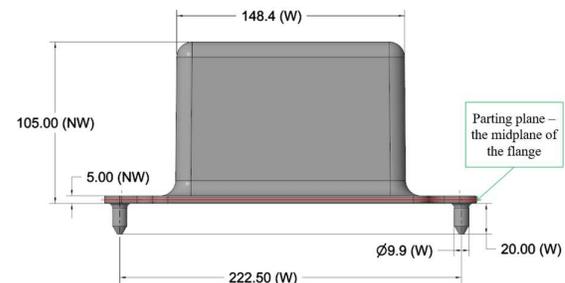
Examples of W and NW dimensions (extracted from the tool)
